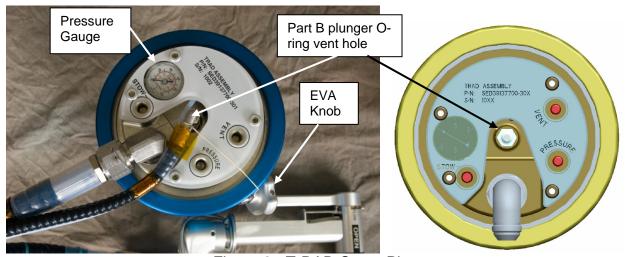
T-RAD Cover Plate (MLI not shown and eva knob not installed in photo)
